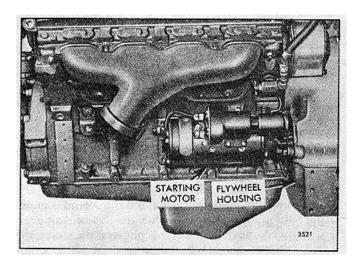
Sprag Overrunning Clutch Type Starting Motor Mounting (Current)
